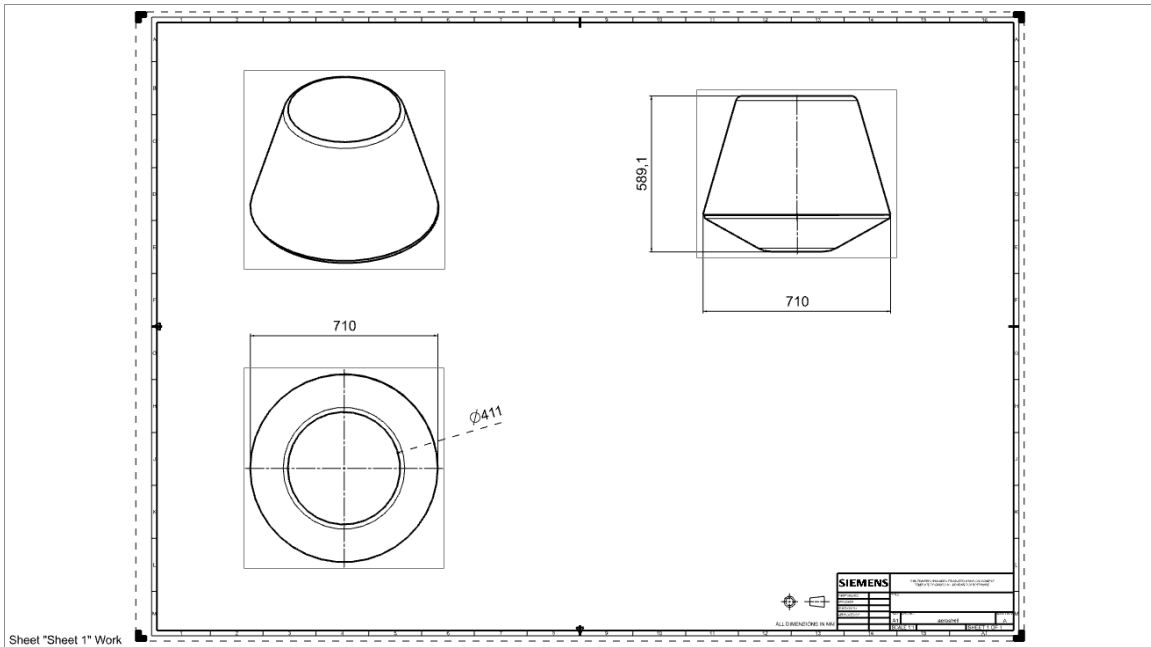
Displayed above is the isometric, top and right side views of the mission aeroshell and heat shield assembly. Dimensions show are in millimeters.
